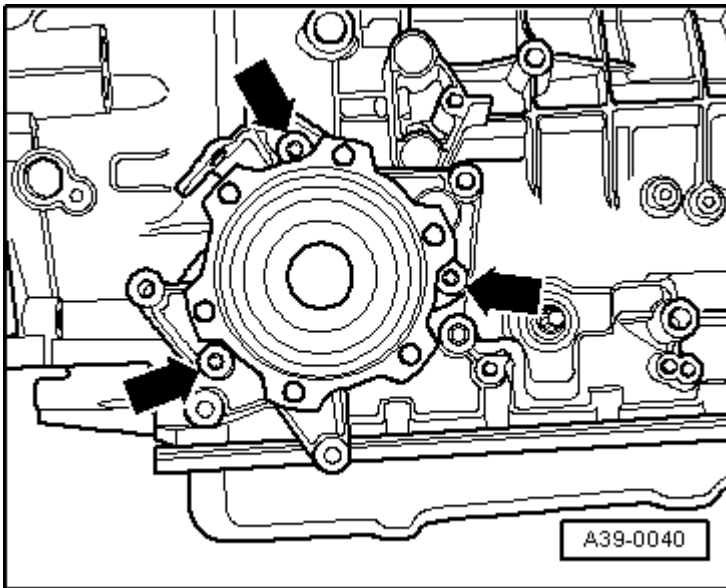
Removing/Installing Left Drive Flange Mounting Bracket
